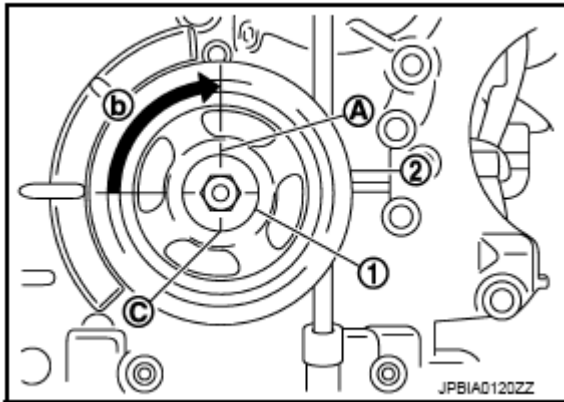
Identifying Tightening Angle Of Crankshaft Pulley Bolt
